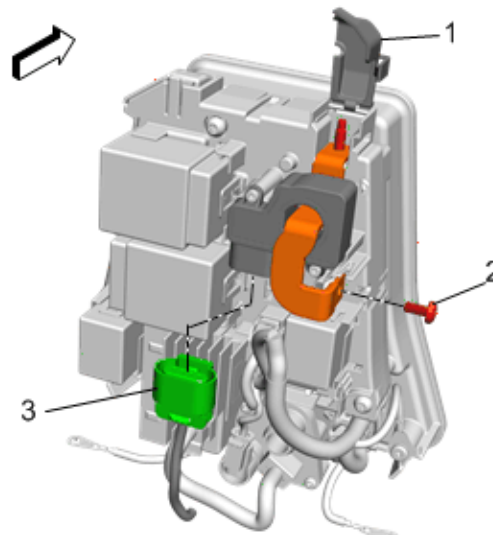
Terminal Cover, Fastener And Battery Current Sensor Connector
